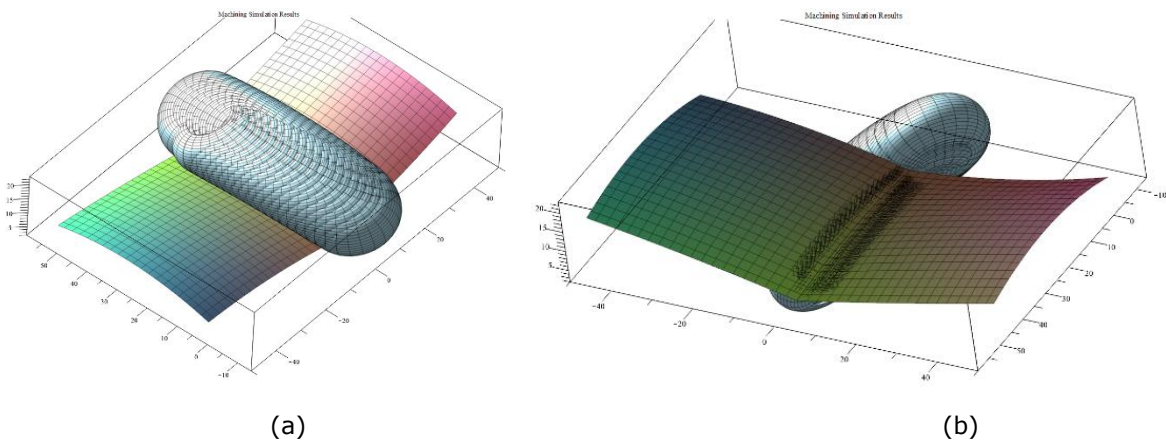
Simulation of multi-pass tool paths for finish machining of common edge between two intersecting Bi-quadratic convex surfaces: (a) Top view (S_1 towards left, S_2 towards right), (b) Bottom view (S_1 towards left, S_2 towards right).
